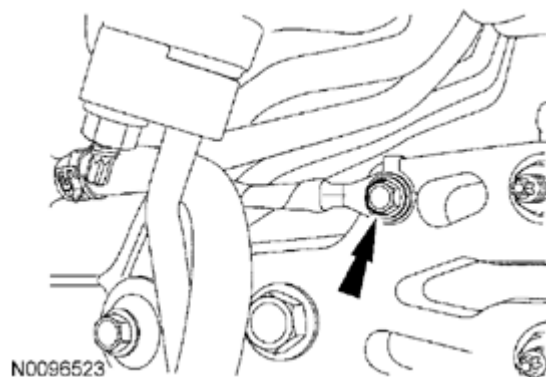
Locating Bolt And Ground Strap On Engine Mount Bracket
